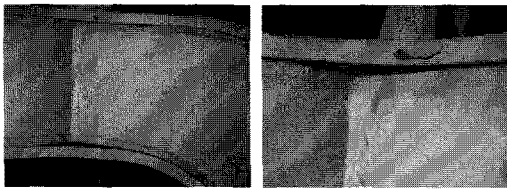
The railway bogie for high-speed train showing weldments and surface flaw with painting peel-off
